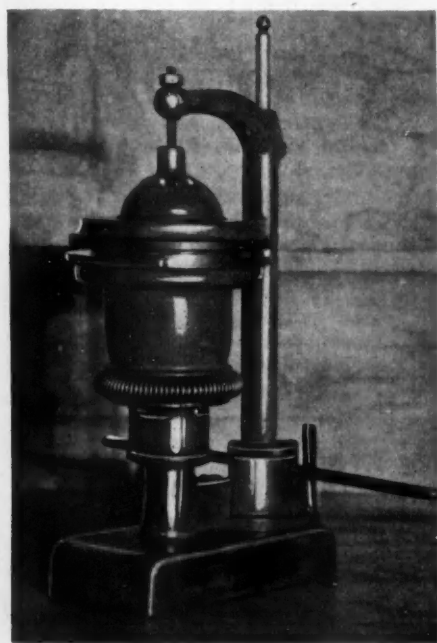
RADIANT GAGE FOR PISTON-RINGS
